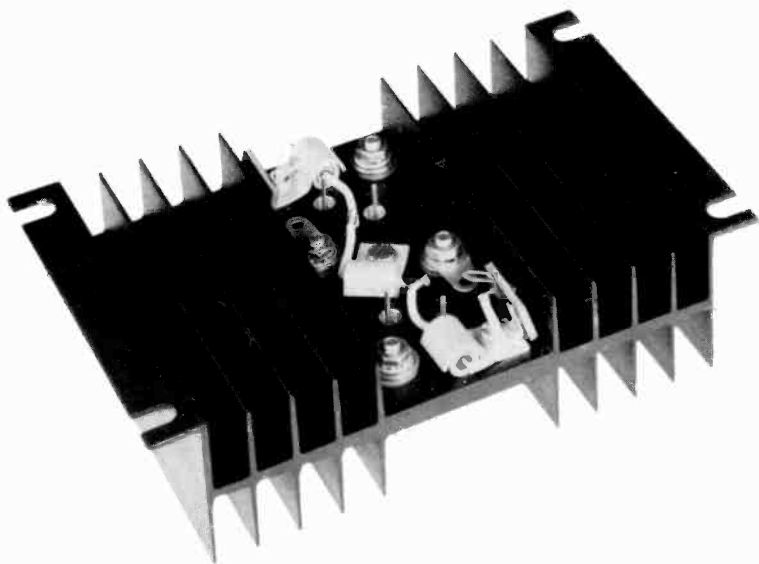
Underside of output-transistor heat sink showing method of mounting compensating diodes.
